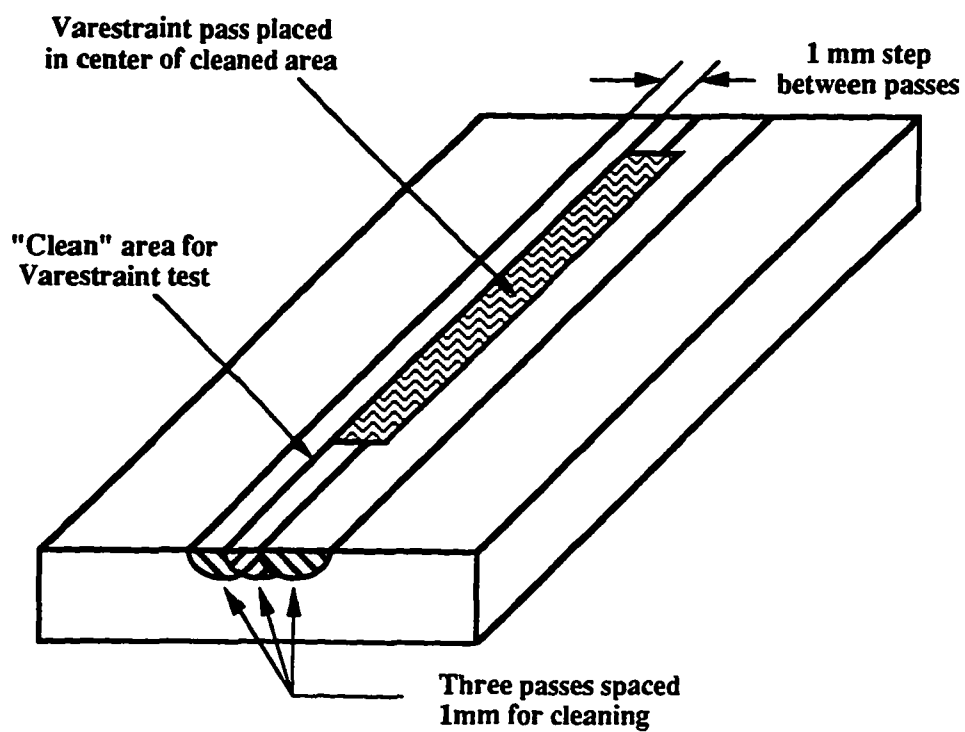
Schematic illustration of oxide cleaning procedure used to produce clean weld surfaces for crack length measurements.
